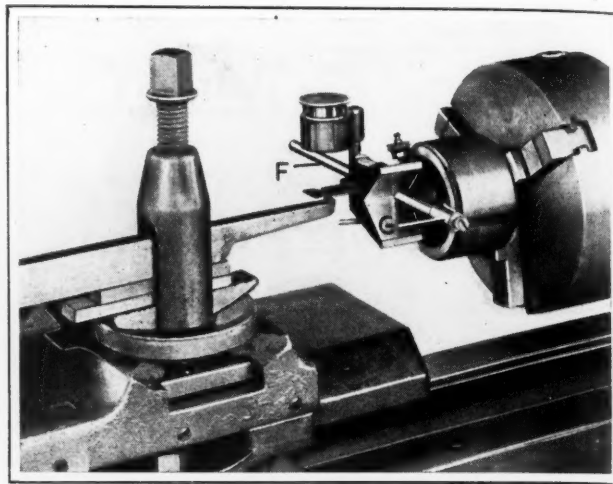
Applying the Optical Thread Tool Gage in setting a Tool for cutting Internal Threads
